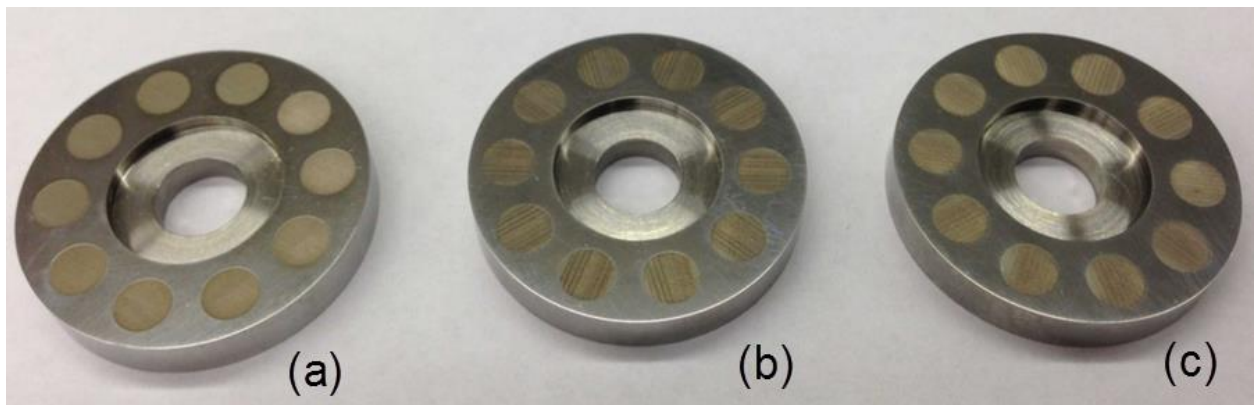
Large-dimple specimen — (a) R shape (b) T2 shape and (c) T1 shape
